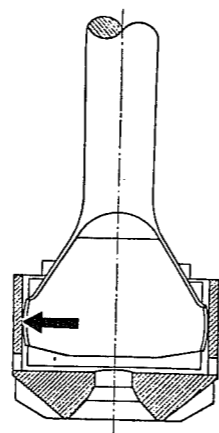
Axle shaft to differential gear clearance - Swing axle.
